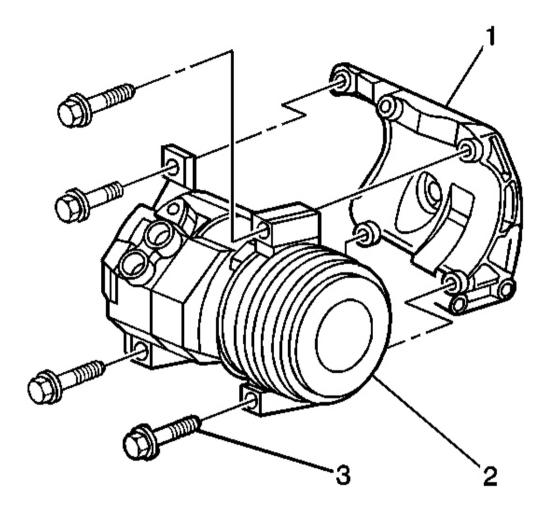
A/C Compressor Mounting Bolts (L18) Courtesy of GENERAL MOTORS CORP.
